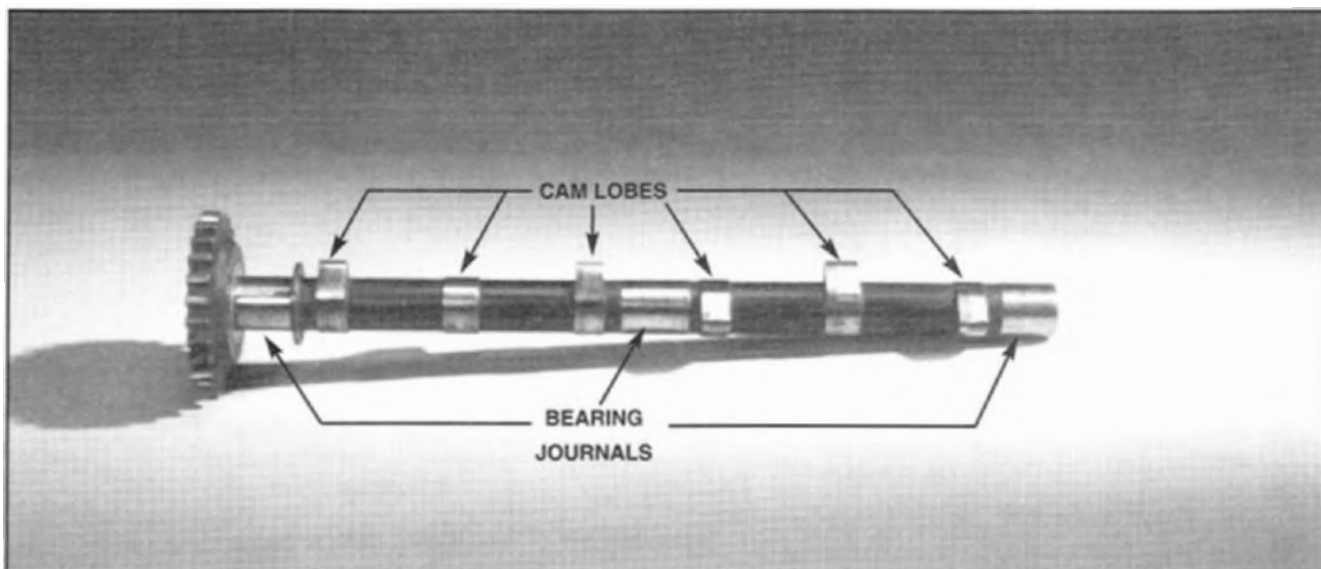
The raised lobe on a camshaft transforms the rotary motion of the camshaft to linear motion.
